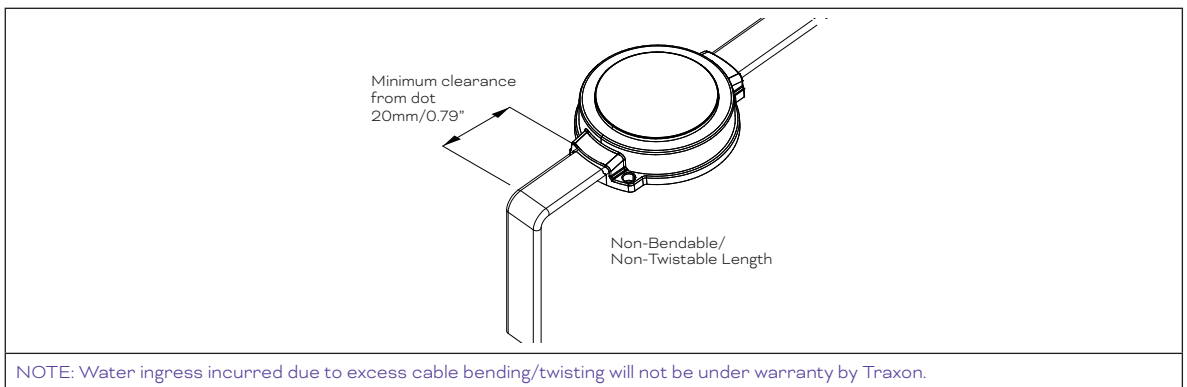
Minimum Cable Bending and Non-Bendable Length Requirement
